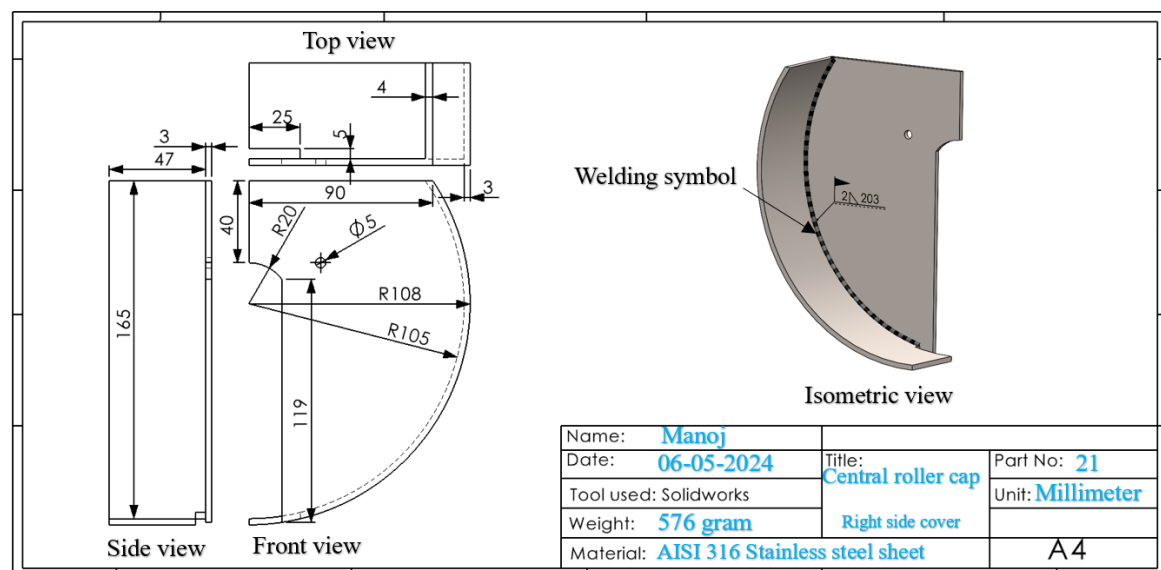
Central roller cap (full assembled isometric view with 2D drawings)
